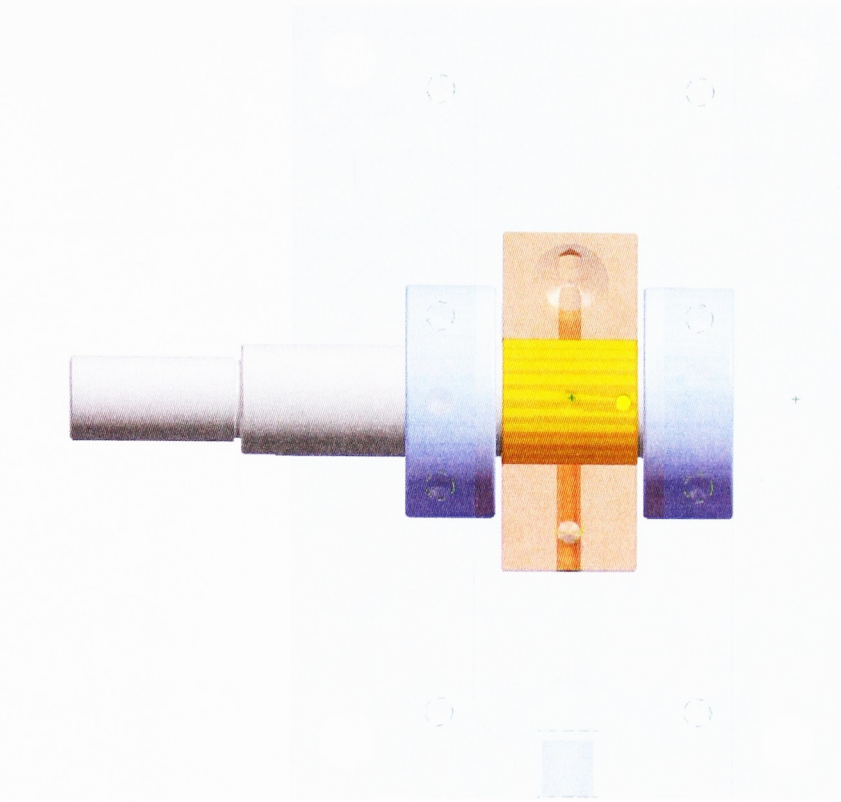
Top Assembly View: Bushing block, housing, and pin
